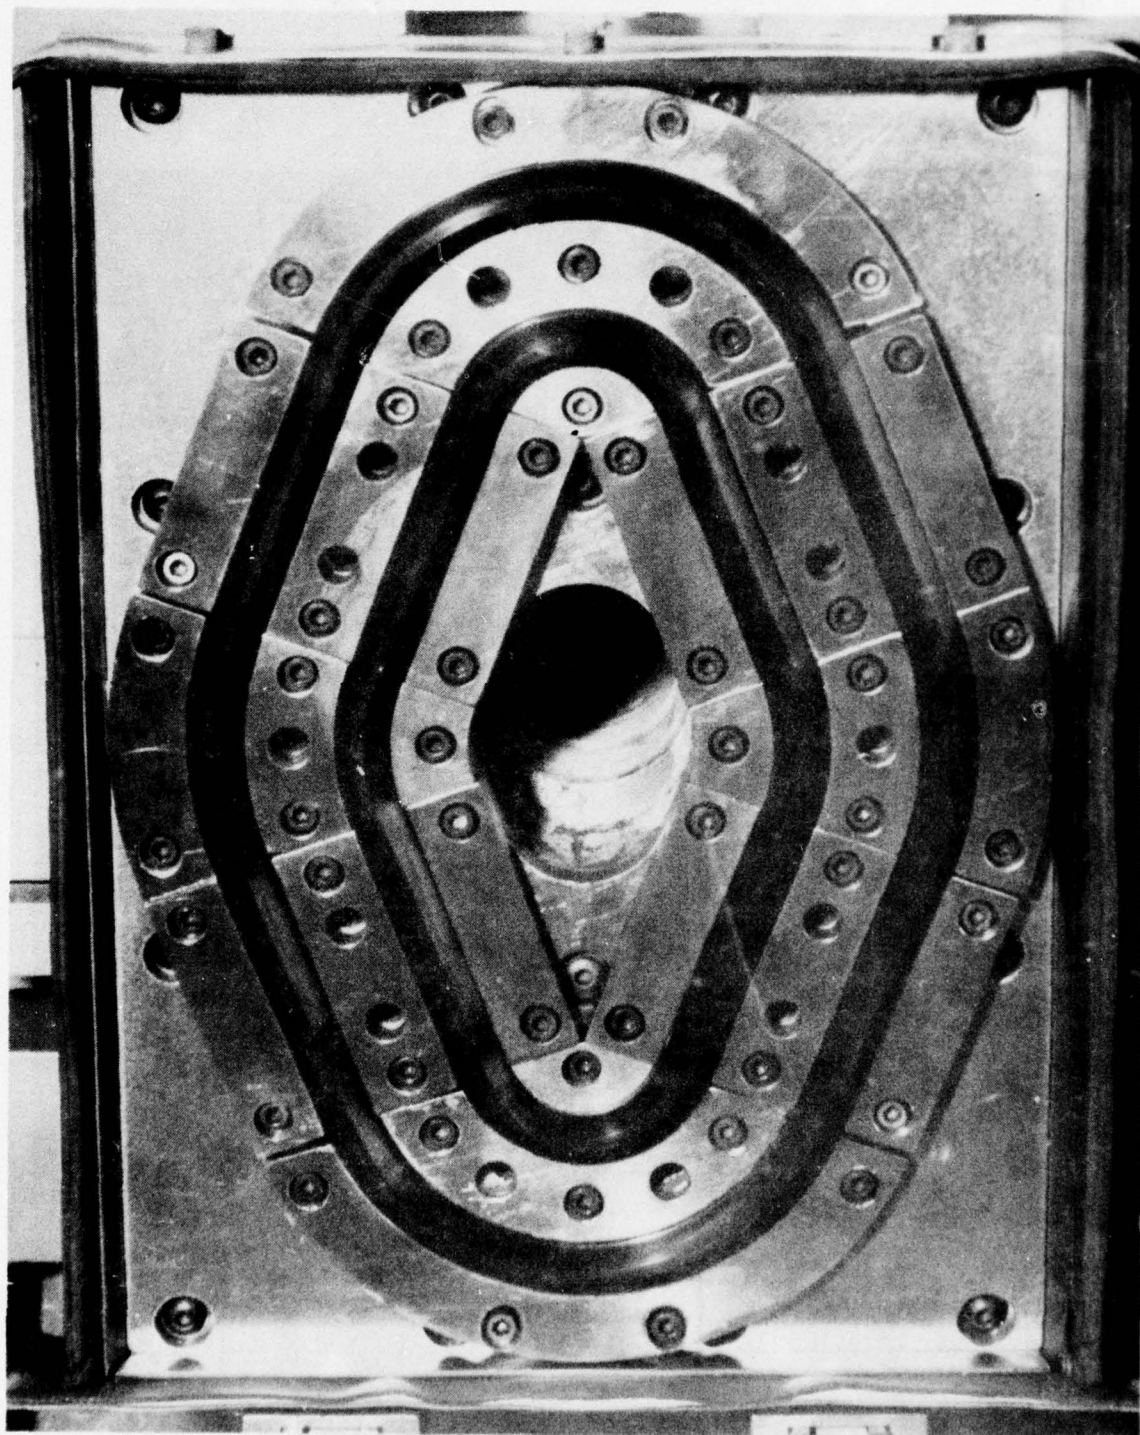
New Sliding Seals on SSEB Weld Head
